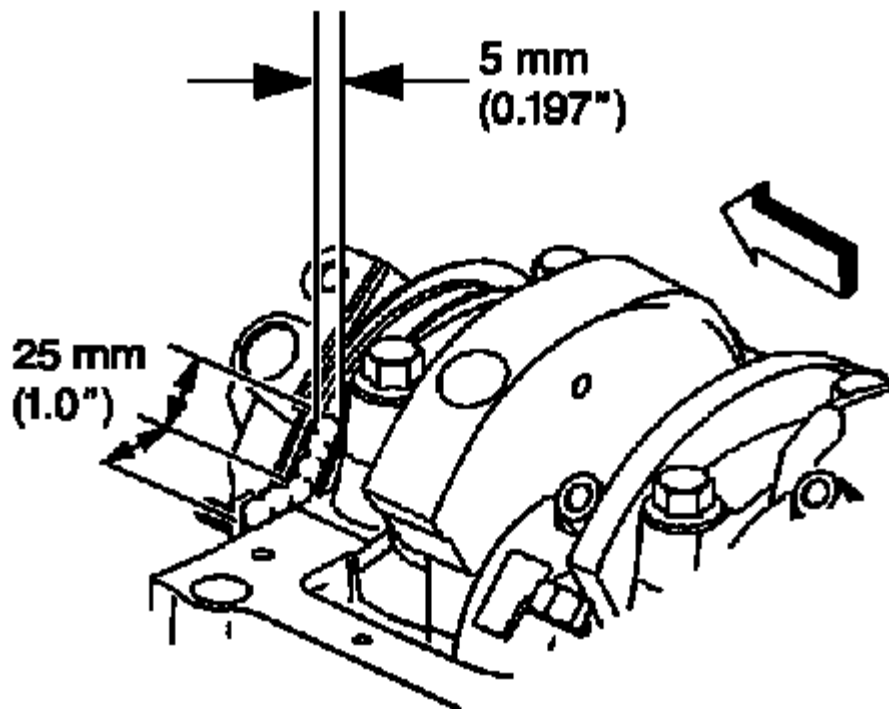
Applying Adhesive To Engine Sides Front Cover To Engine Block Junction
